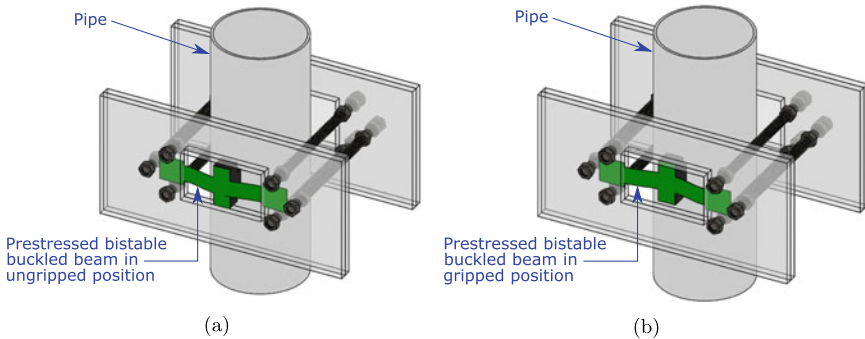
Trimetric view of the gripper with pipe in a ungripped and b gripped positions
